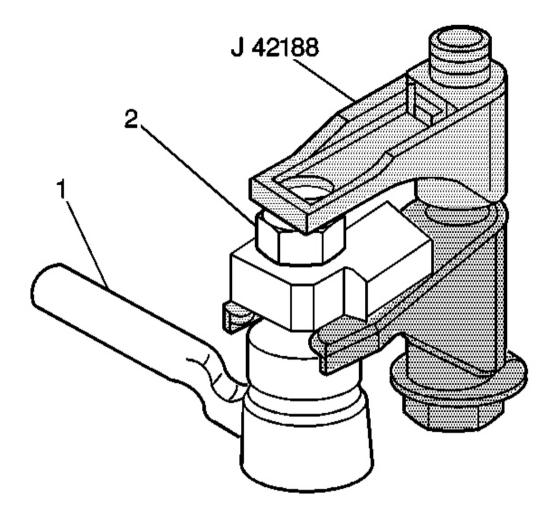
J 42188, Lower Ball Joint Stud & Nut Courtesy of GENERAL MOTORS CORP.
